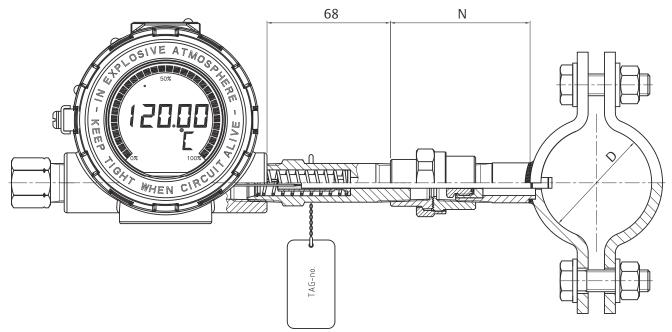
Pipe Clamp Sensor Assembly with Rosemount 3144P
